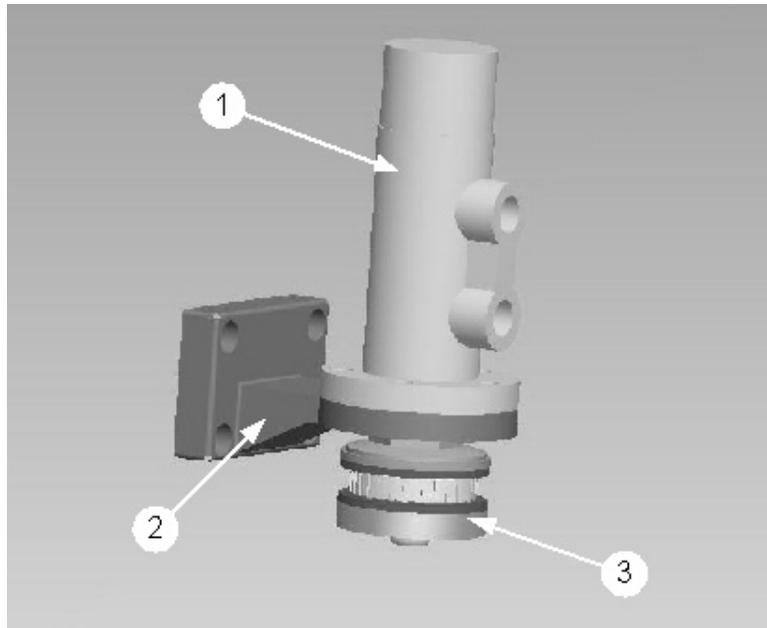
RHT-Belt Drive components with the shrouding removed: 1) RHT-Rotary Adaptor Assembly, 2) rotary motor assembly, and 3) neoprene timing belt.
